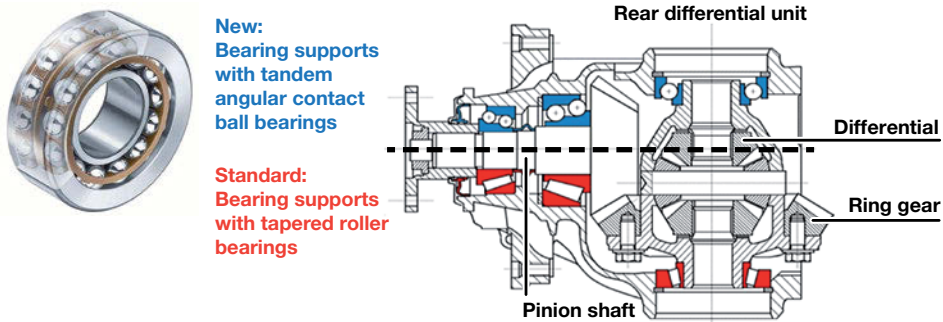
Use of tandem angular contact ball bearings in the rear axle differential (blue) instead of tapered roller bearings (red)
